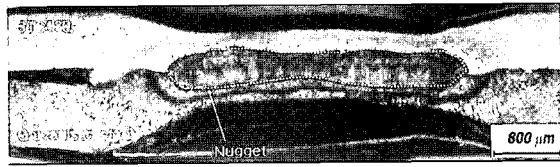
Macrostructure of spot weld between STS 430 and galvanized steel
